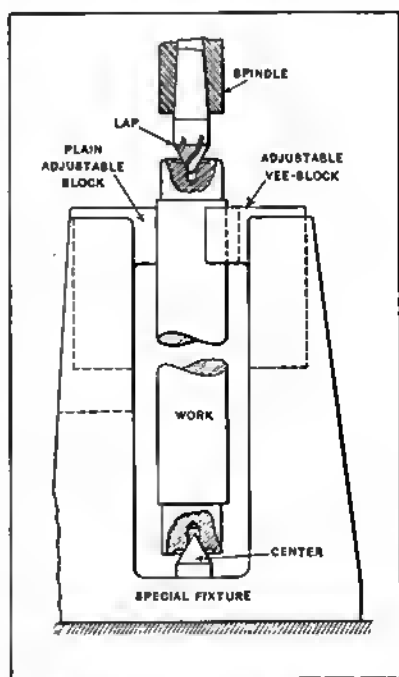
Method of lapping Arbor Centers in a Drilling Machine
